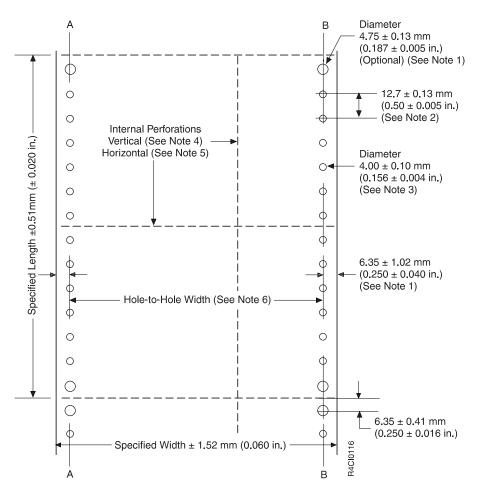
Paper dimension and perforation requirements. See "Paper Tolerances". The accumulation of individual tolerances should not exceed the specified width tolerance of ± 1.52 mm (± 0.060 in.).
